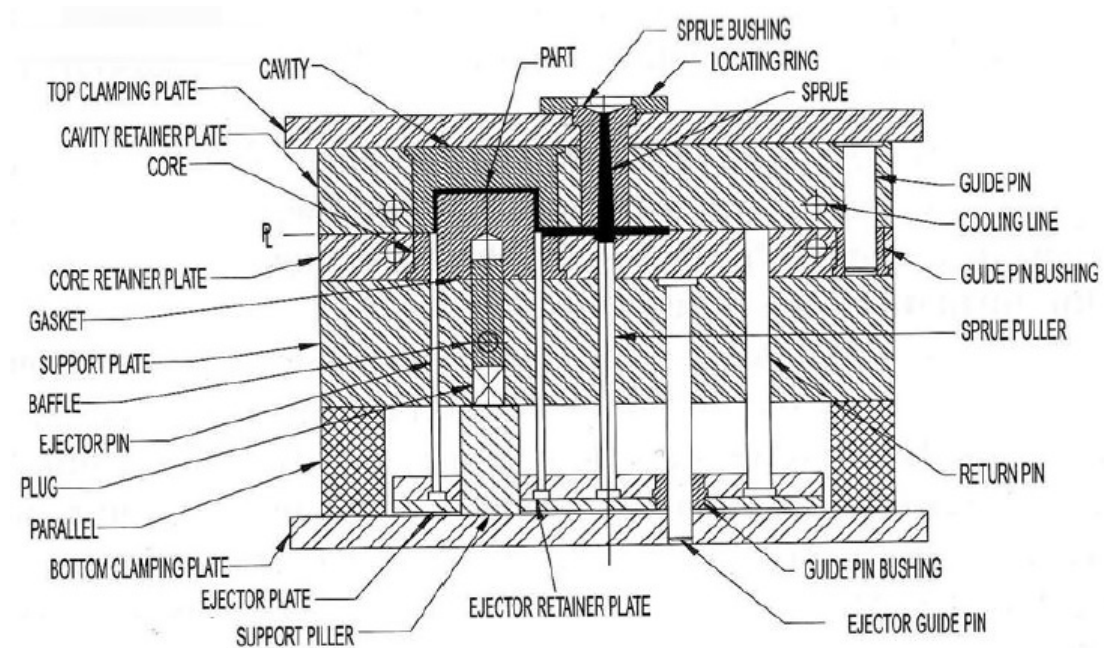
An example steel mold for plastic injection machine by courtesy of [39].
